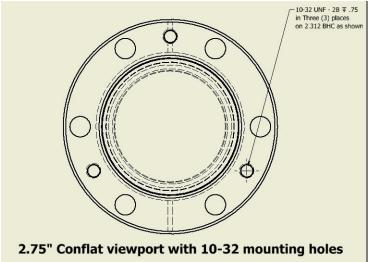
Shows a 2.75" CF window with three tapped holes located on the same Bolt Hole diameter as the flange bolt holes.
